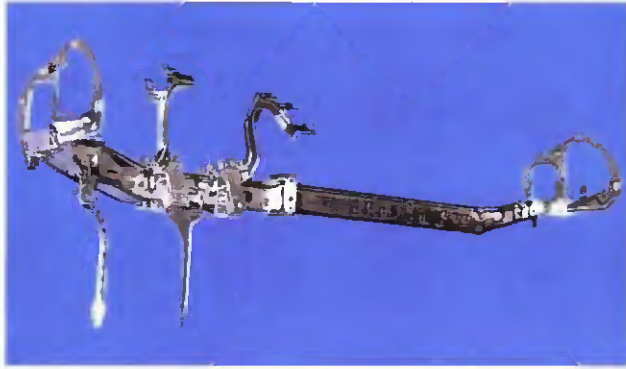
Nonvacuum electron beam-welded aluminum structural beam for a car's instrument panel, here completed by GMA-welded attachments.
